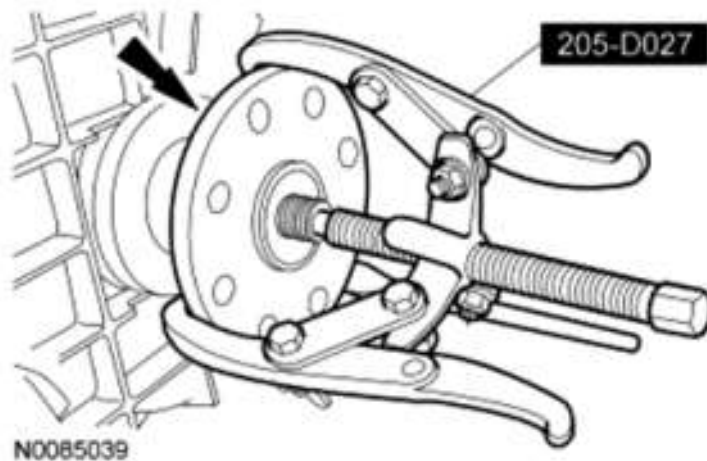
Identifying Jaw Puller (205-D027) And Flange
